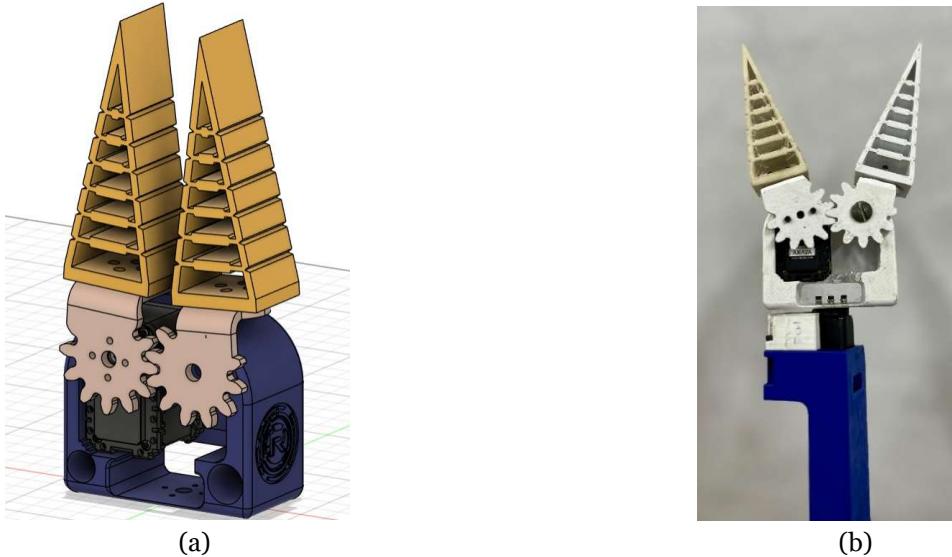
(a) CAD of Gripper Design. (b) Gripper Design
